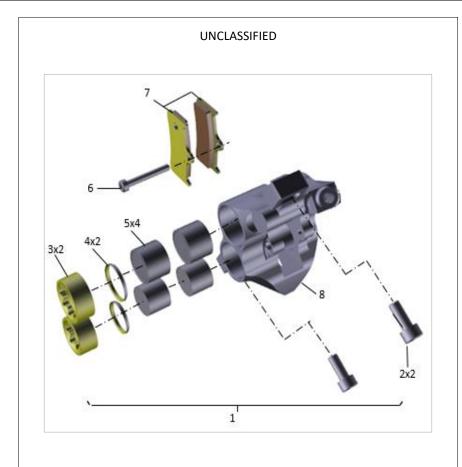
FRONT WHEEL BRAKE (SHEET 1 OF 2)
